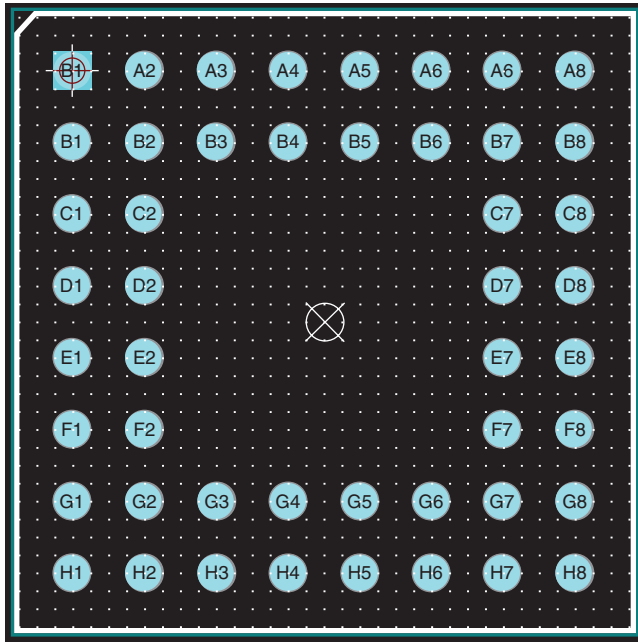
Completed 8×8 pin grid array with 48 pins.
